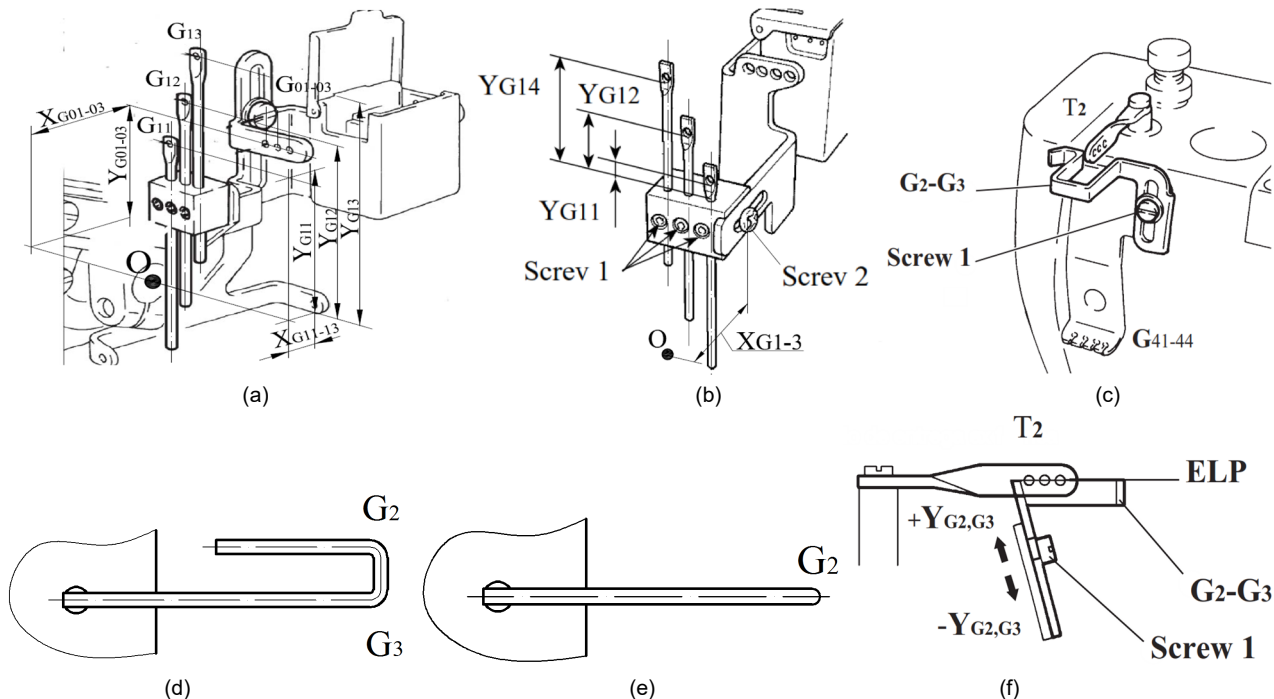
Parameters of thread guides G_{ji} : (a) vertical adjustment, (b) both X and Y coordinates, (c,d) U-shaped thread guides of the W562-05BB «Pegasus» machine, (e) I-shaped thread guides of the CF 2300M-164M «Uamoto» machine, (f) thread guides G_{2-3} (G_2) adjustment parameters.
